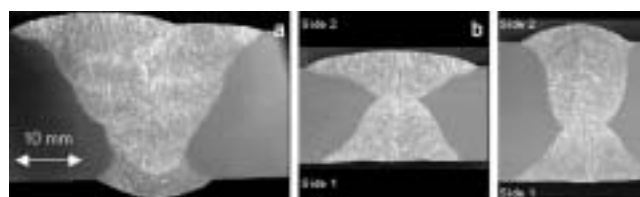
Cross sections of duplex SCW™ welds. a) One sided V-joint in 22 mm plate (weld V-22). b) V-joint in 14 mm plate (weld V-14). c) X-joint in 20 mm plate (weld X-20).
